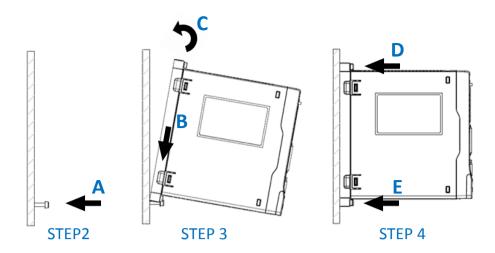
Mechanical Mounting of AMD2000 D2103 Servo Drive
